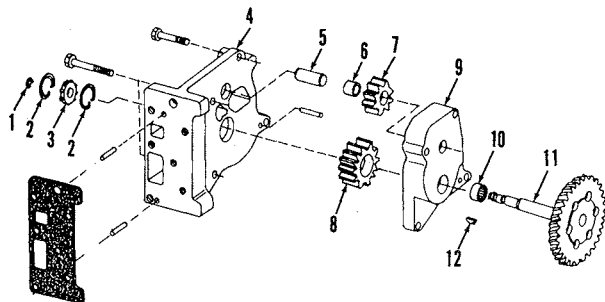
Exploded view of transmission oil pump used on Power Shift models.
